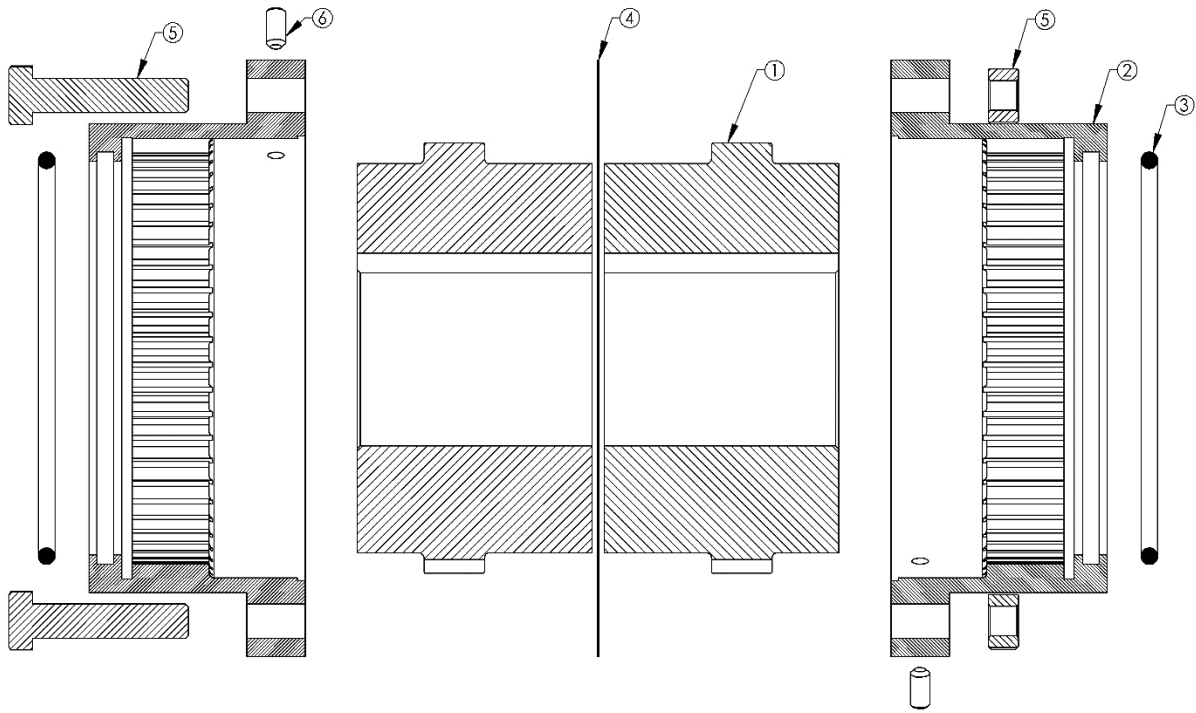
STEEL GEAR DOUBLE FLEX COUPLING (EXPLODED VIEW)
